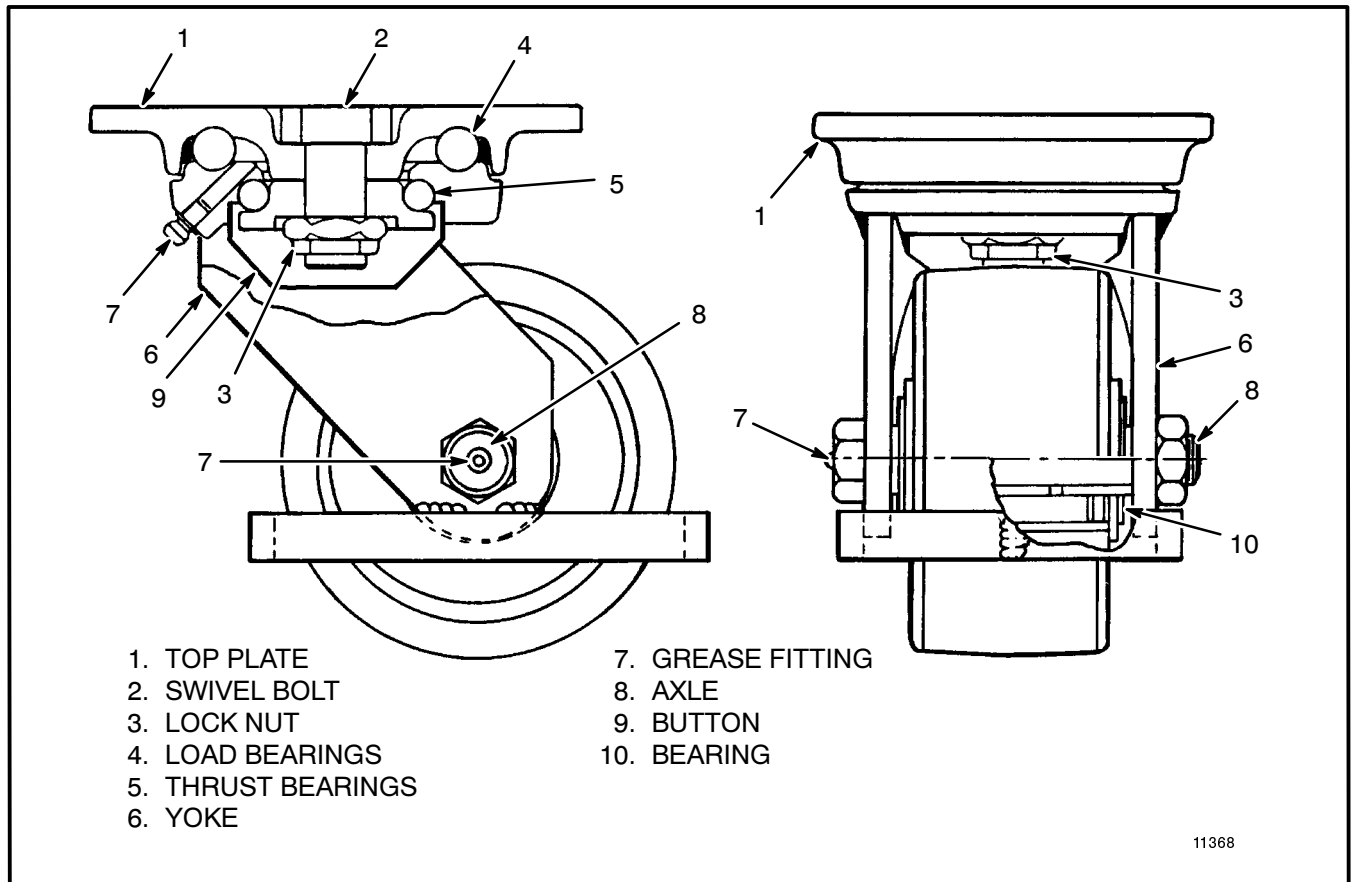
OPTIONAL CASTERS – W40-60XL
